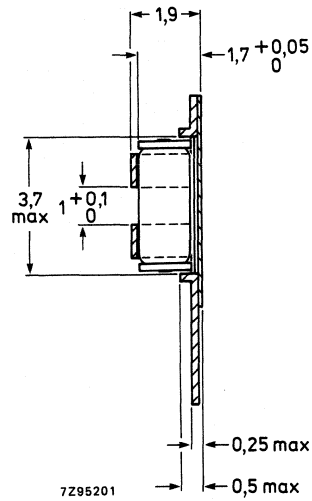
Cross-sectional view of bandolier with SOD-80 devices.
